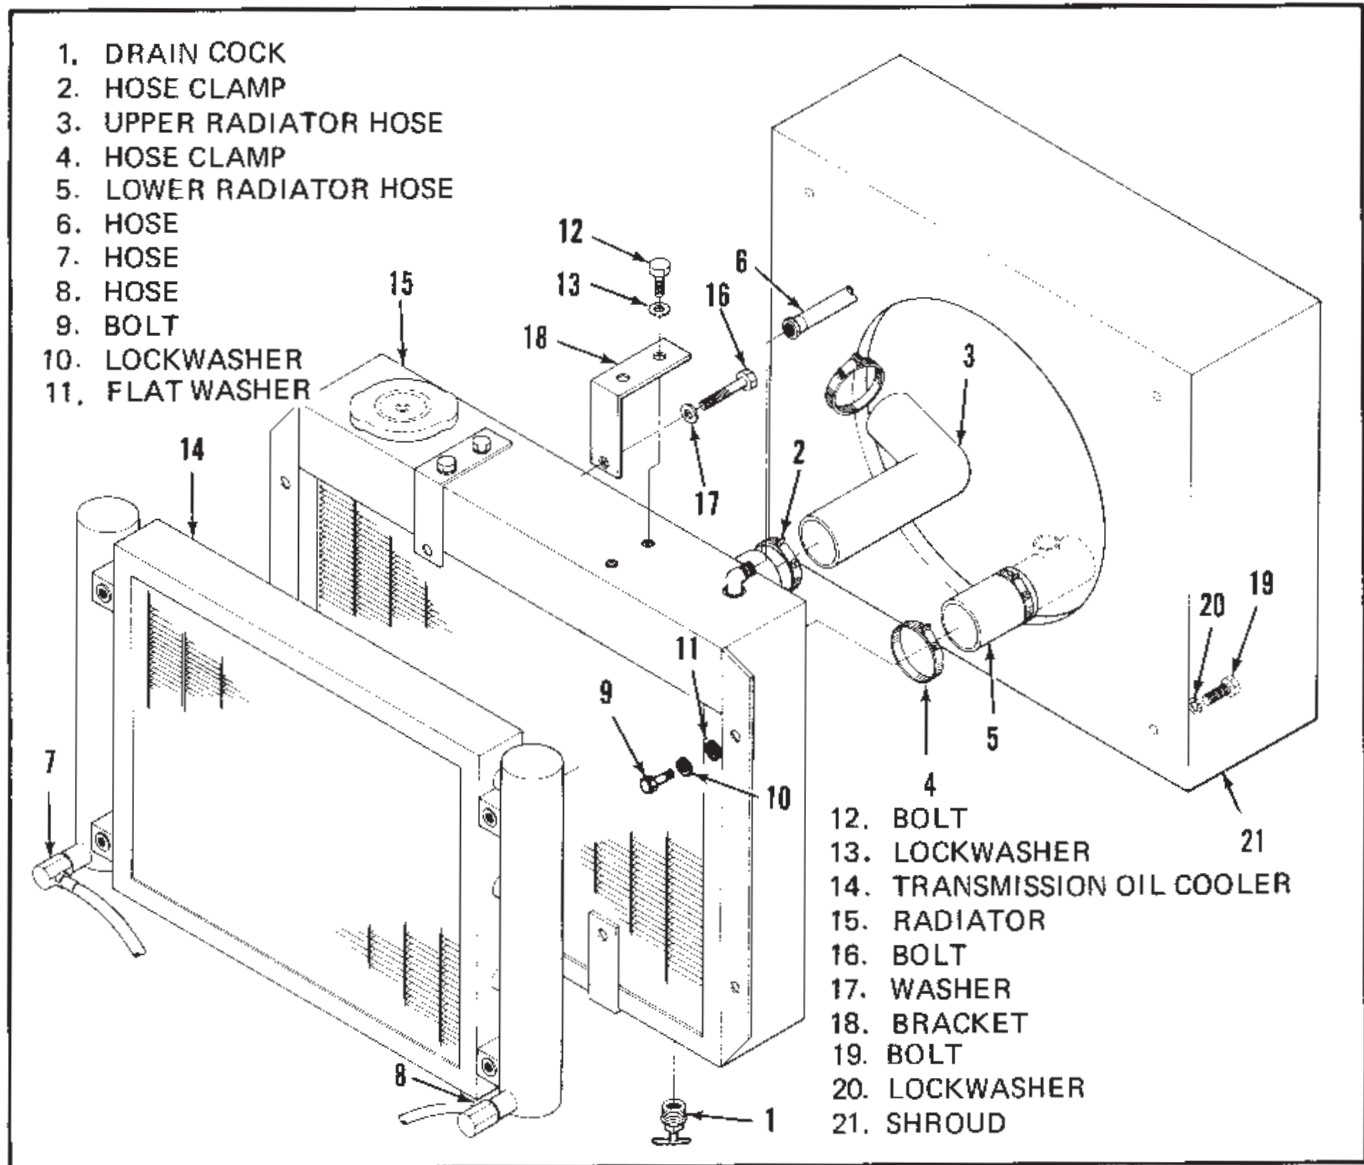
Radiator and Transmission Oil Cooler Removal
